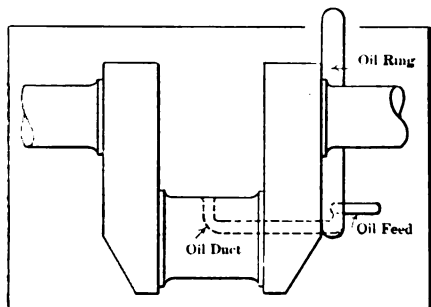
Method of fitting centrifugal oil ring to crank throw. The oil duct is shown
